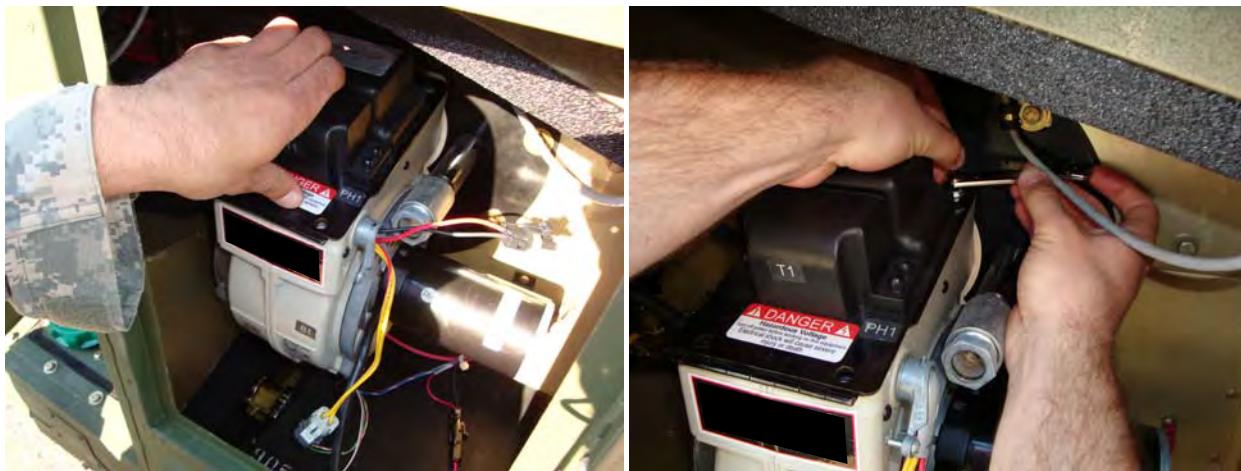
Position Ignition Transformer on Burner Housing and Secure with Screws.
